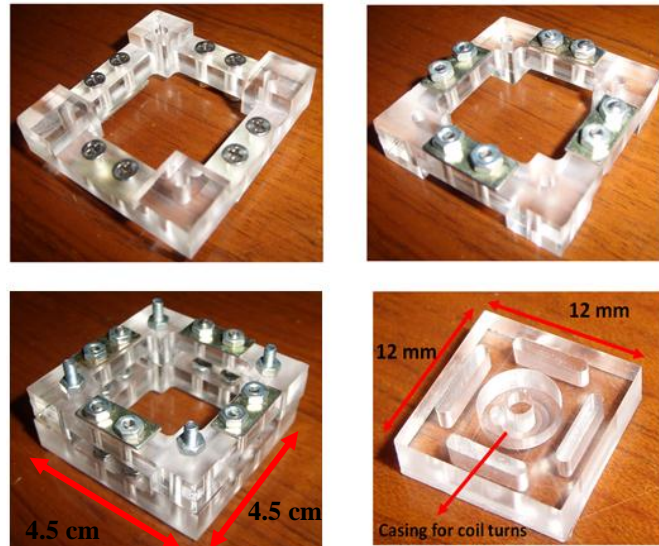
Fabricated frames for magnet diaphragm and coil diaphragm (top), assembly of the frames and casing for the coil turns ( bottom).
